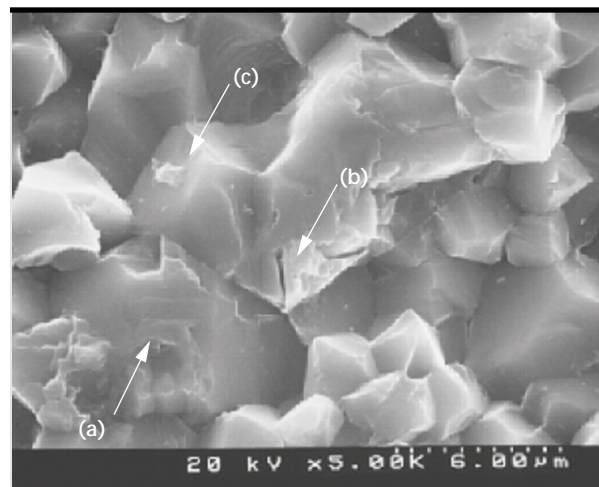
Surface of the as-machined BeO samples. Areas marked (a), (b), and (c) show features of machining mark, machining-induced crack, and machining debris, respectively, on the machined surface.
